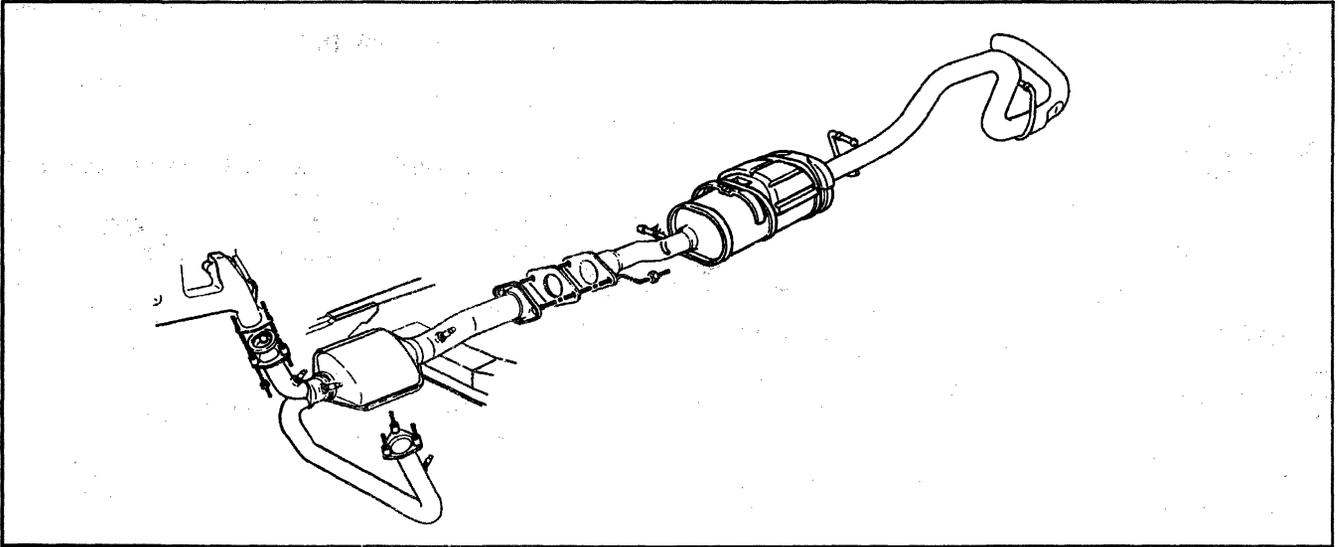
Exhaust System - C/K 1 Regular Cab Short Box w/5.0L Engine
